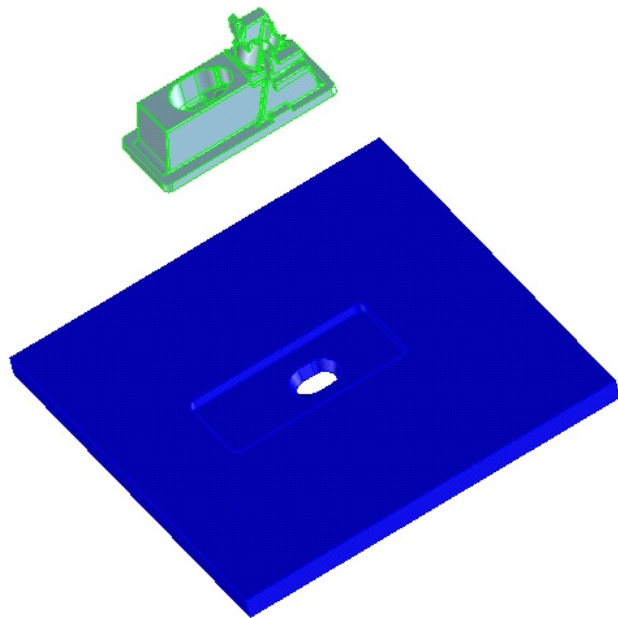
Illustration of base plate mounting features for ADNS-6130-001 laser mouse trim lens
